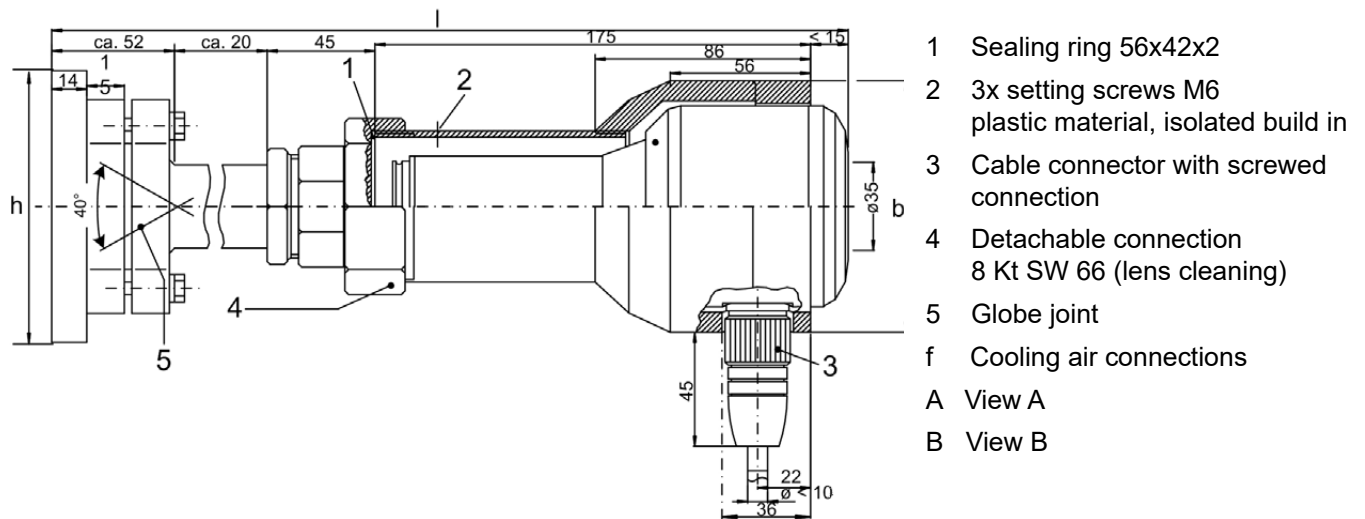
Adjustable holding device FS 51 type 659R6107
